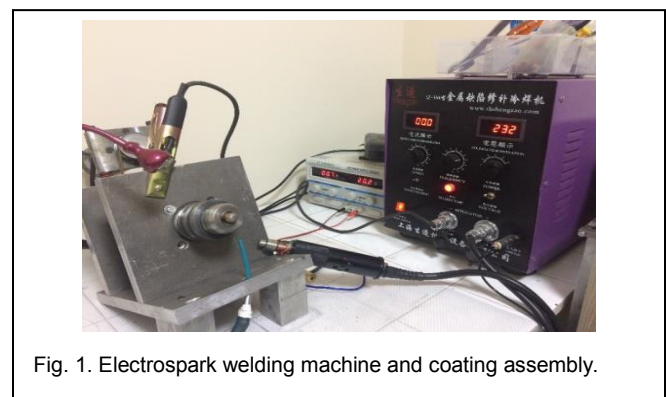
Electrospark welding machine and coating assembly.
